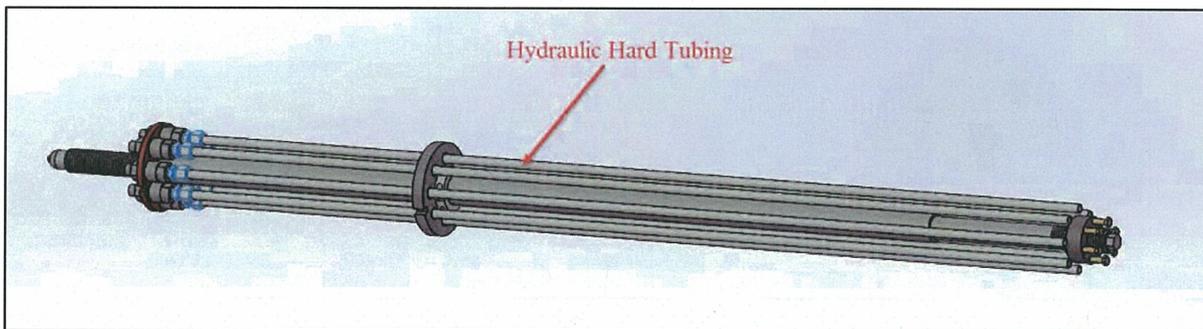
REA Bolt Assembly (with hydraulic lines)
